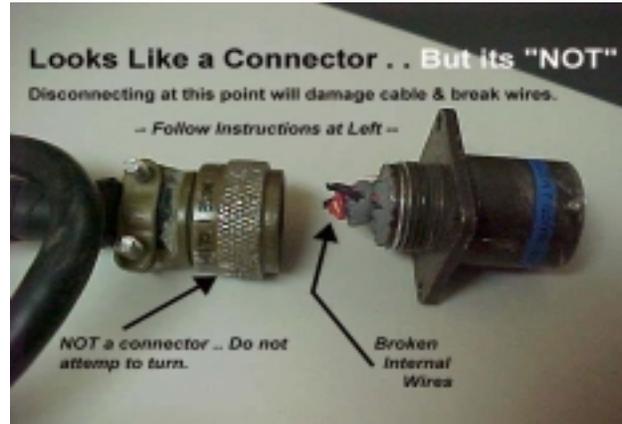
Damaged PLGR Cable Assembly when improperly disconnected
